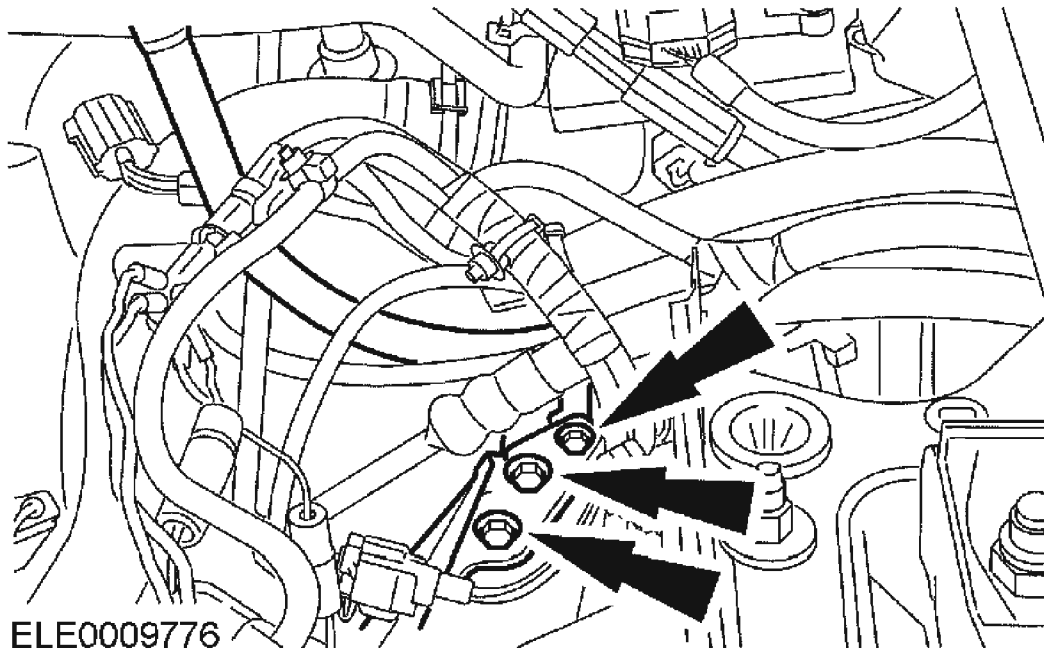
Removing Fluid Filler Tube And Shift Cable Bracket Bolts
